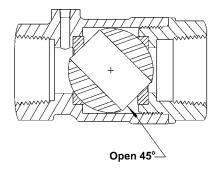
Cutaway drawing of the ball valve in the 45 degree position.
